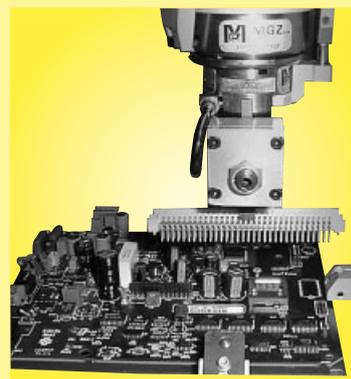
Pick-and-place machine for odd form components (Courtesy of JOT Automation GmbH)
